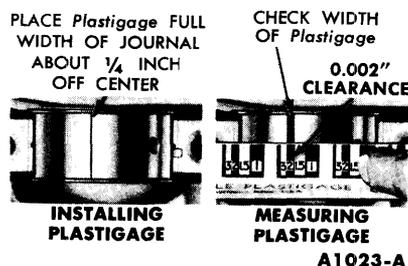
Installing & Measuring Plastigage—Engine Removed
